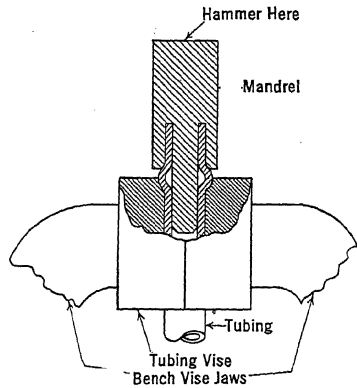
Hand tool for beading soft, small-diameter tubing.
